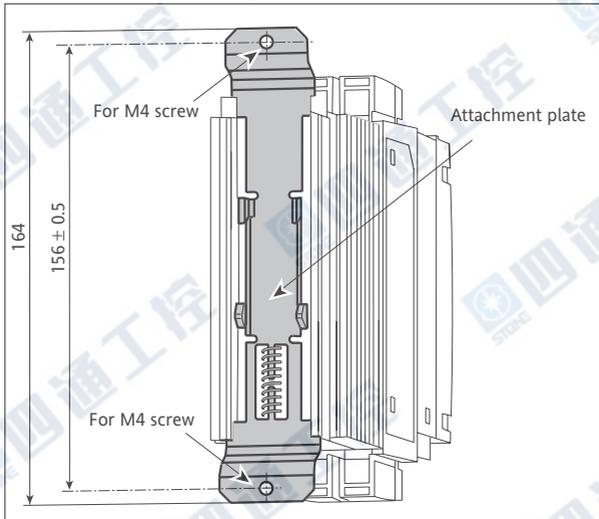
Bulkhead mounting using an attachment plate (16A to 63A, rear view)
